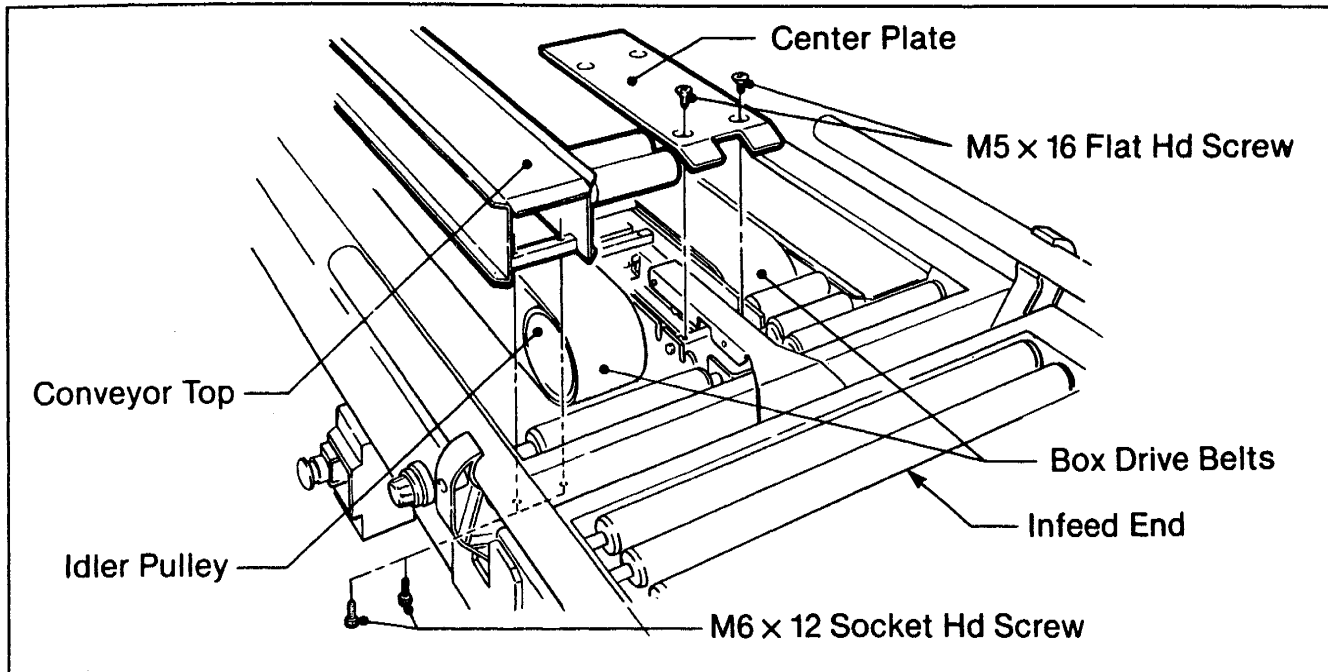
Box Drive Belt Adjustment - Frame Bed Infeed End
